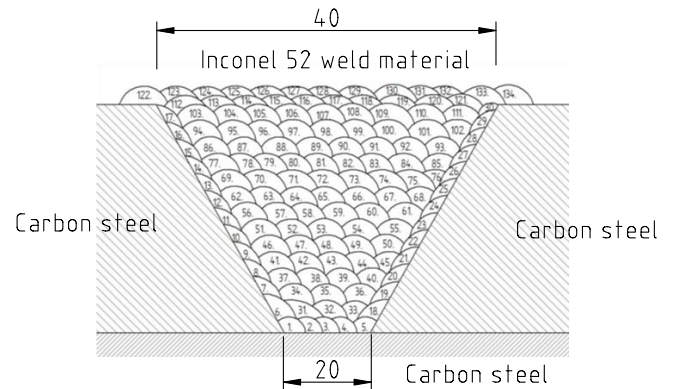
WELD PASS CONFIGURATION IN THE WELDING TRIALS. THE ORDER OF THE WELD BEADS IS INDICATED. (MEASUREMENT UNITS ARE IN MM).
